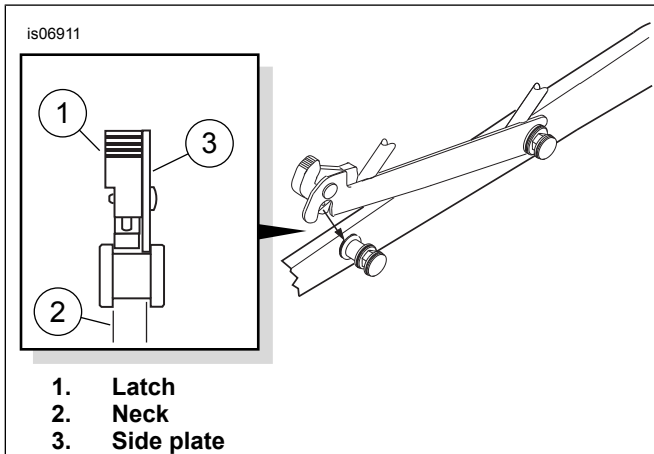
Pull back rotary latches and lower handrail onto turn rear docking points.
